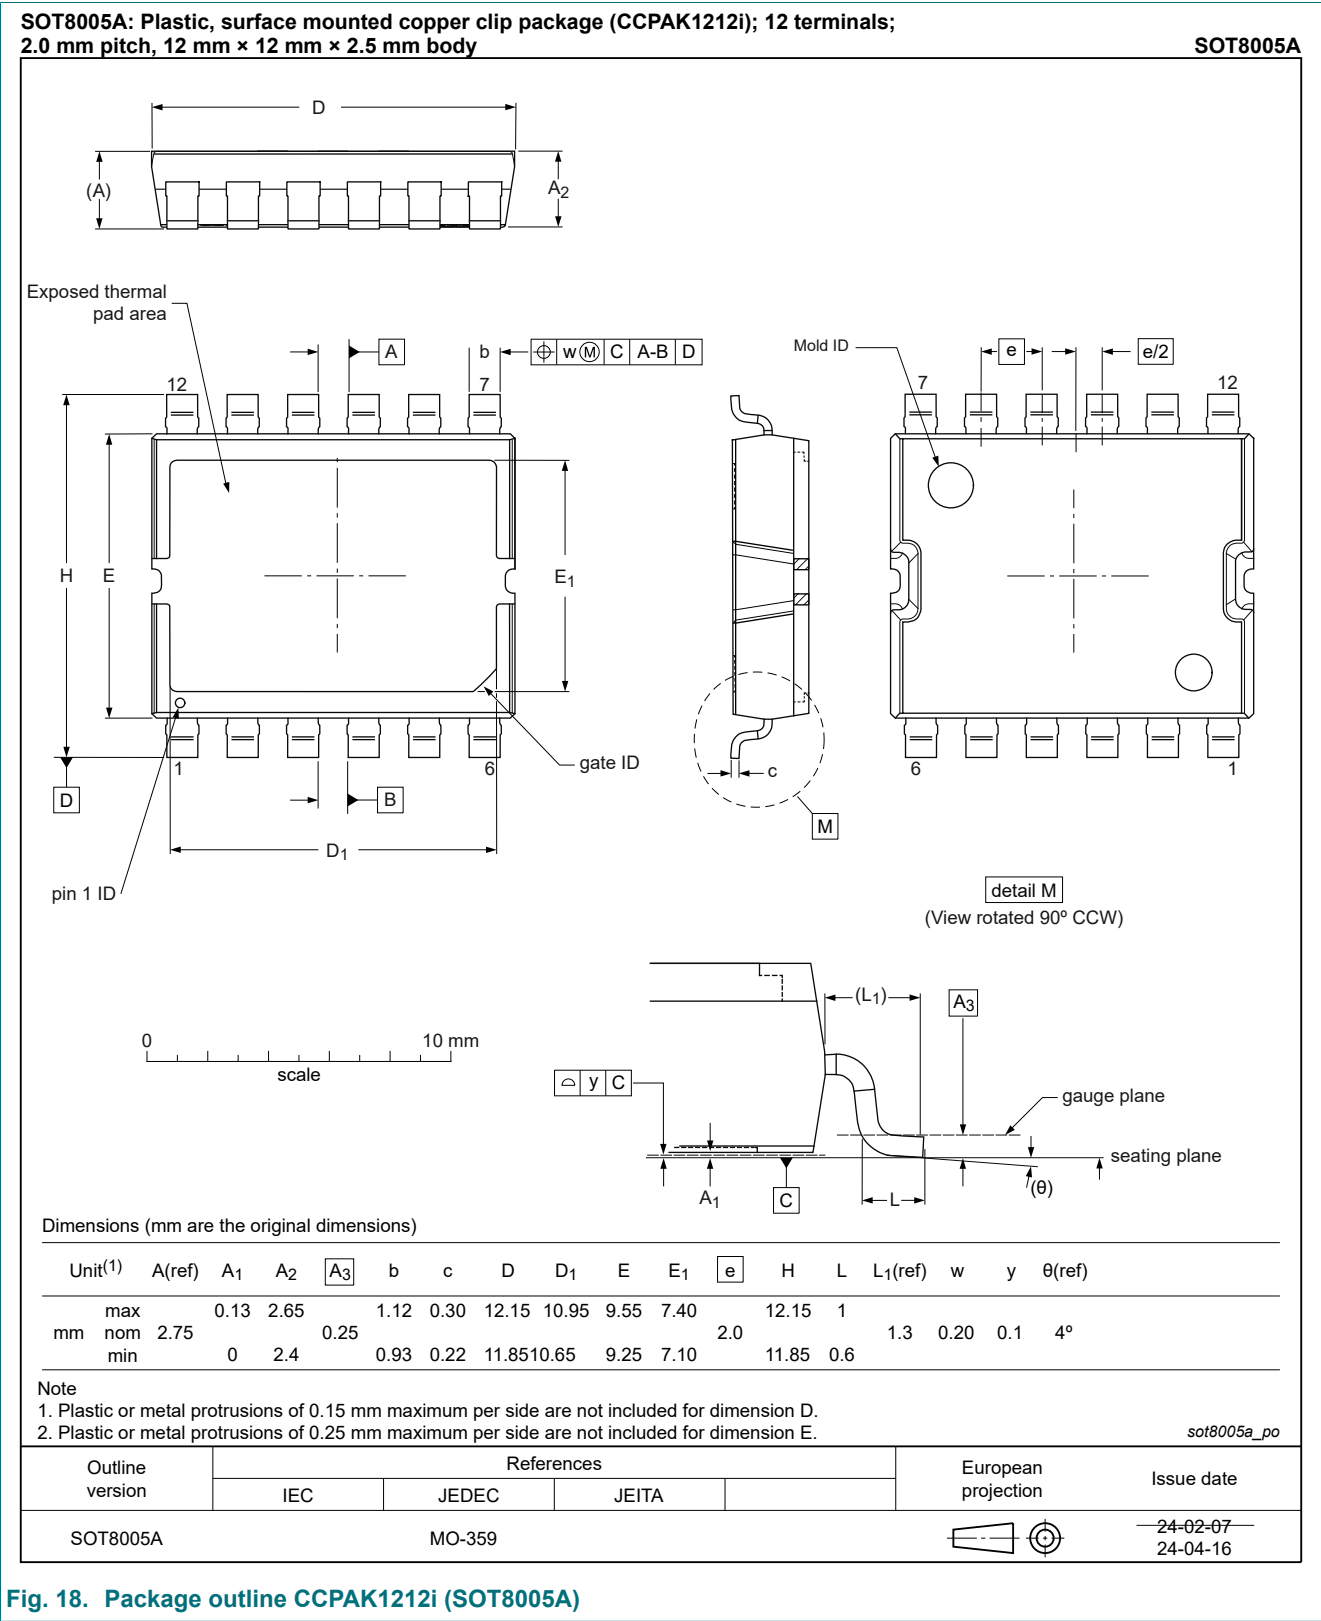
Package outline CCPAK1212i (SOT8005A)
